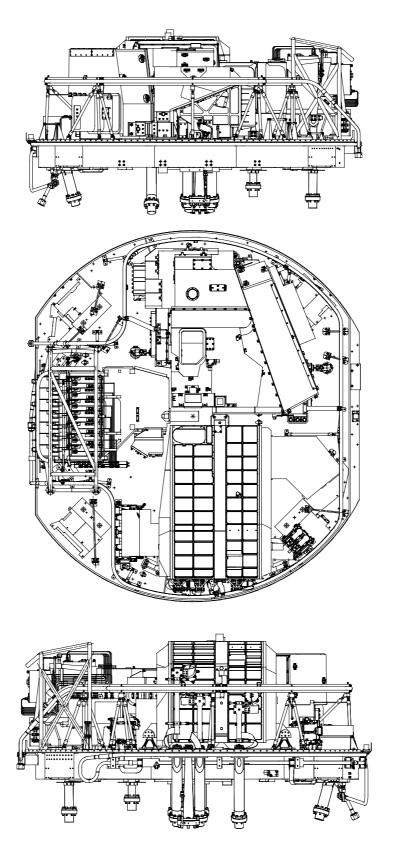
Herschel Optical Bench equipped with instruments, -yx View, Top View and yx View
